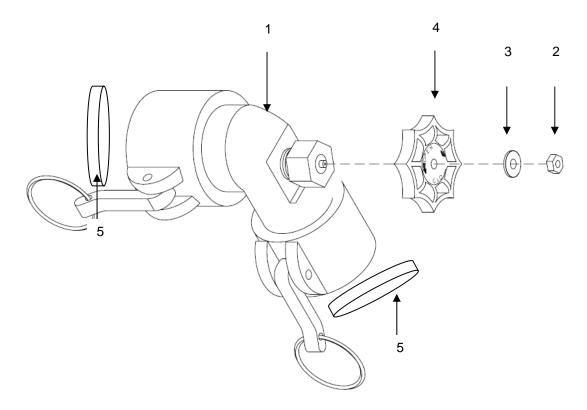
Installing gaskets and replacing handwheel assembly on the valve coupler.
